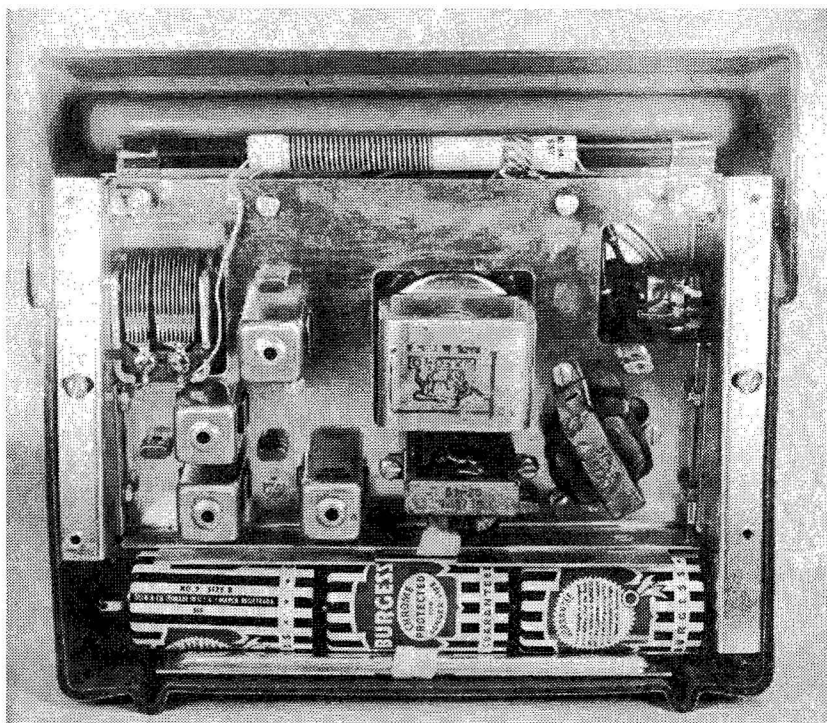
Rear view of the XR-1 receiver, with back cover removed. Note that "conventional" chassis-type construction is used instead of an etched circuit board.
